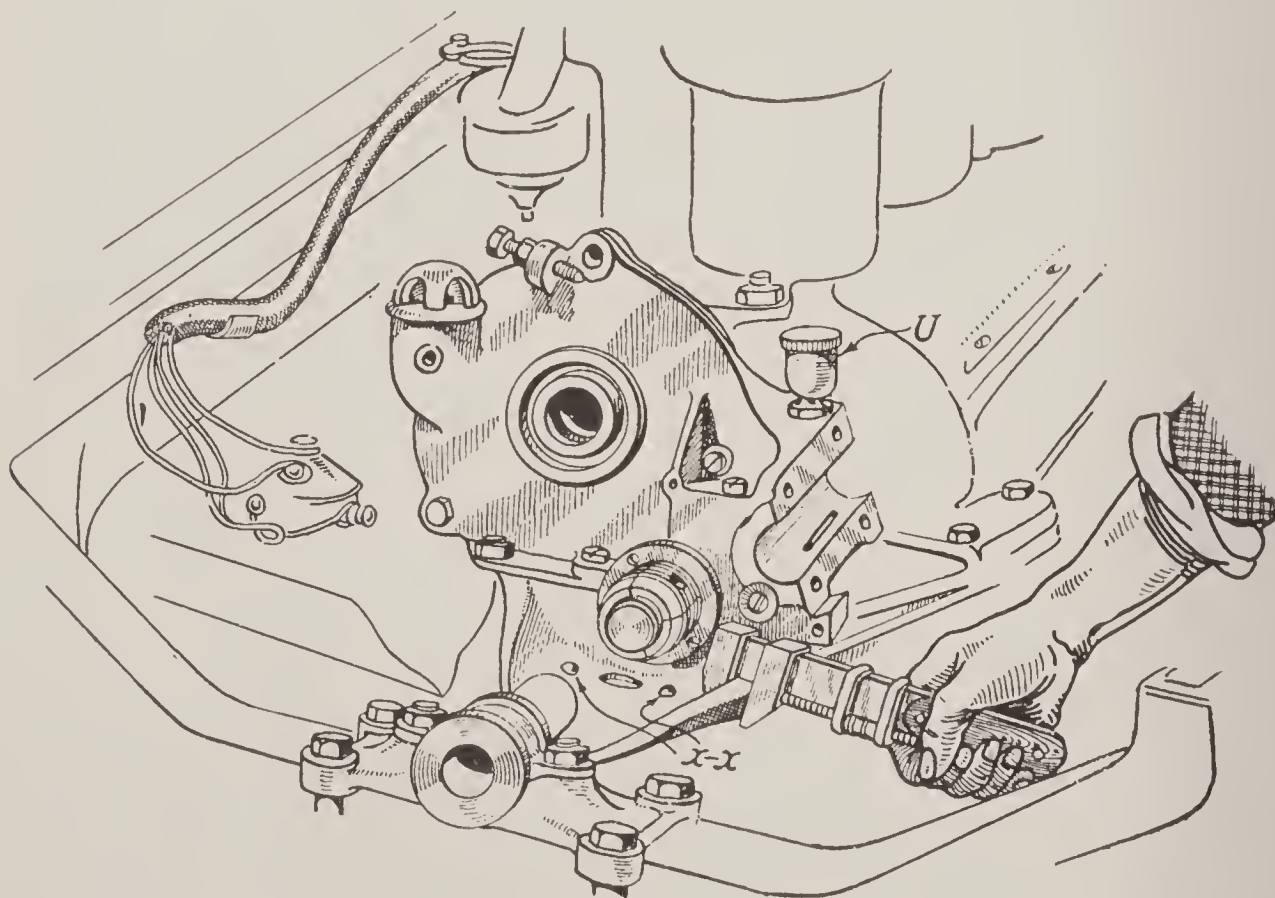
Mounting Gear Ring and Adjusting Nose Pan in Genemotor Ford Installation
